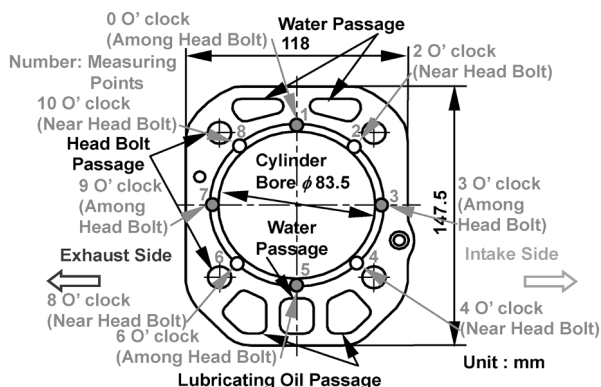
Shape, Dimensions and Measuring Points of Test Cylinder Head Gasket
